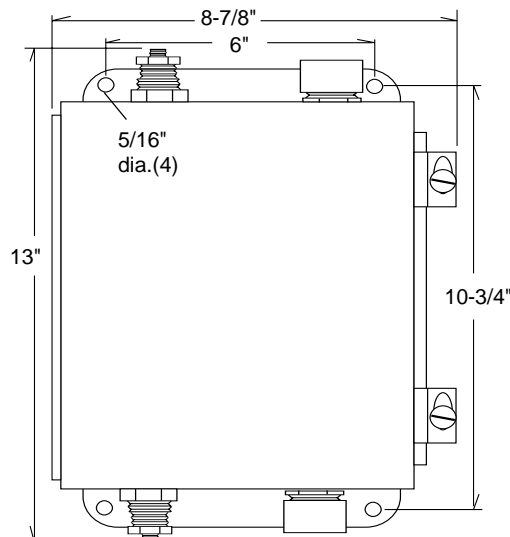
Mounting Dimensions - Fluidic IHS Module
